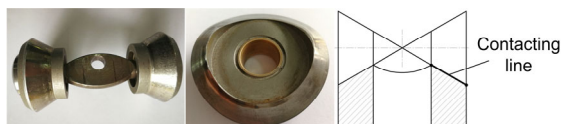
Abrasion in the taper roller-cam rail mechanism
